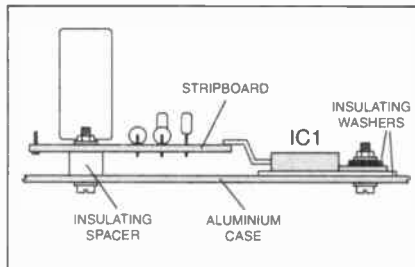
Suggested method of mounting the circuit board and regulator on the underside of the case cover.
